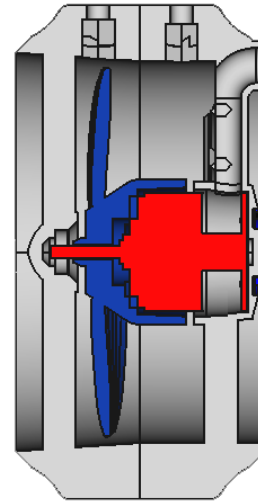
ETR100 thruster cross-sectional view showing inner casing profile and motor placement.
